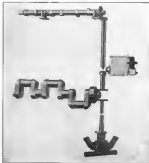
CRANKSHAFT, MAIN DRIVE AND PUMP DRIVE
